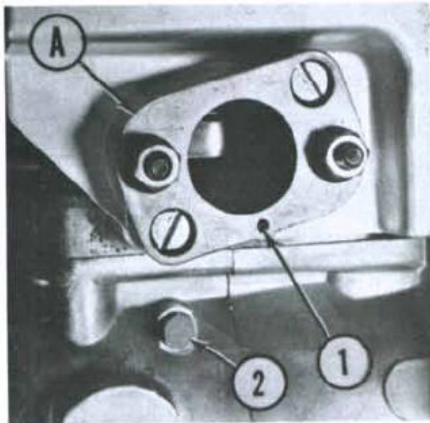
Carburetor adapter flange of the type equipped with internal pulse passage for fuel pump operation. External passage port must be plugged as shown.
